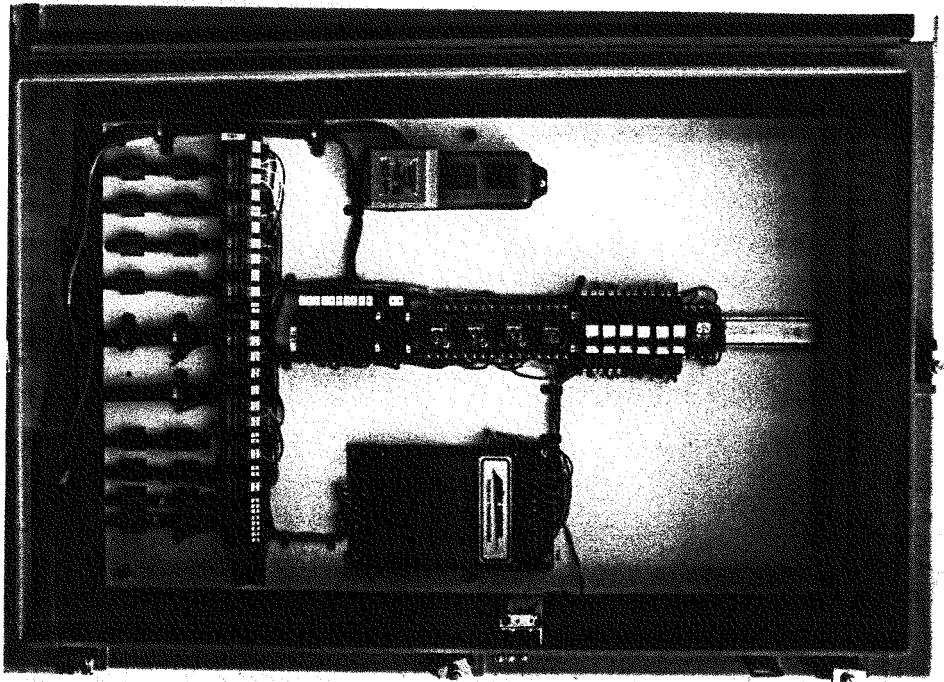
Modular Components Snap-locked To The Rails And Wiring Completed
